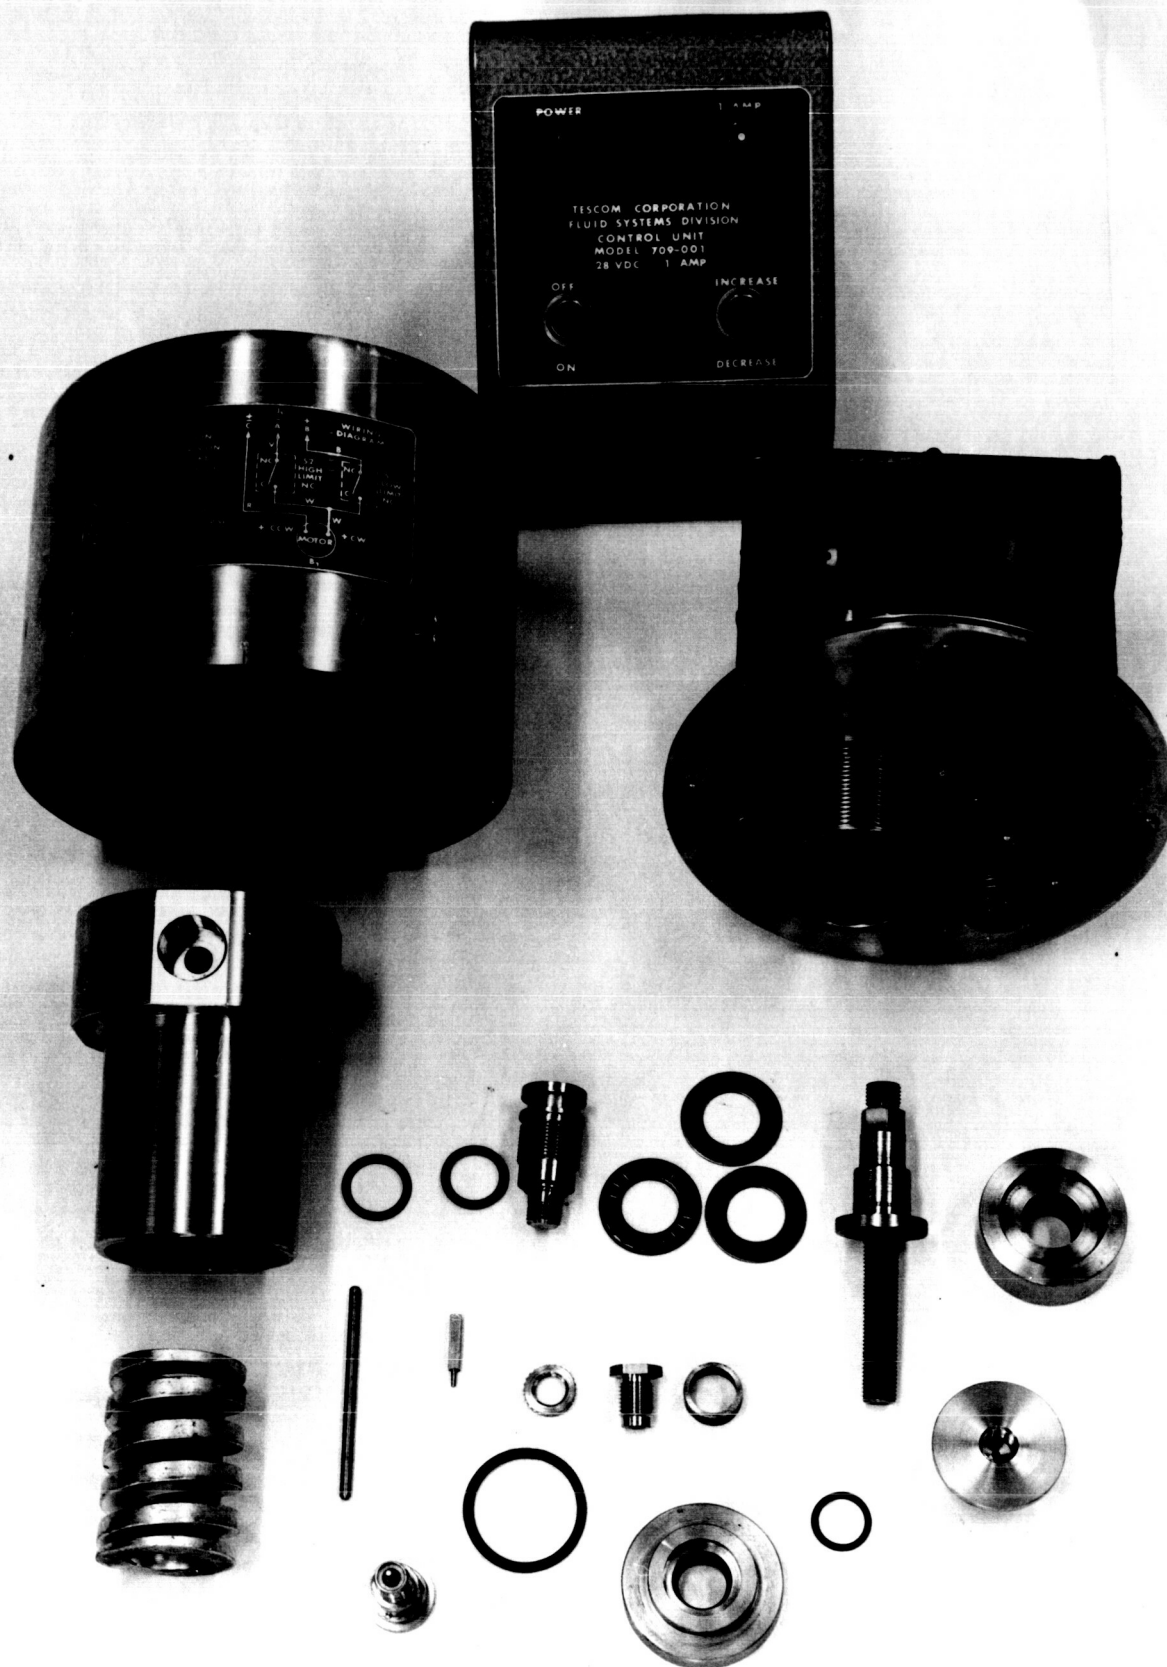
PHOTOGRAPH OF DISASSEMBLED TESCOM 1/4 INCH MOTOR OPERATED REGULATOR
